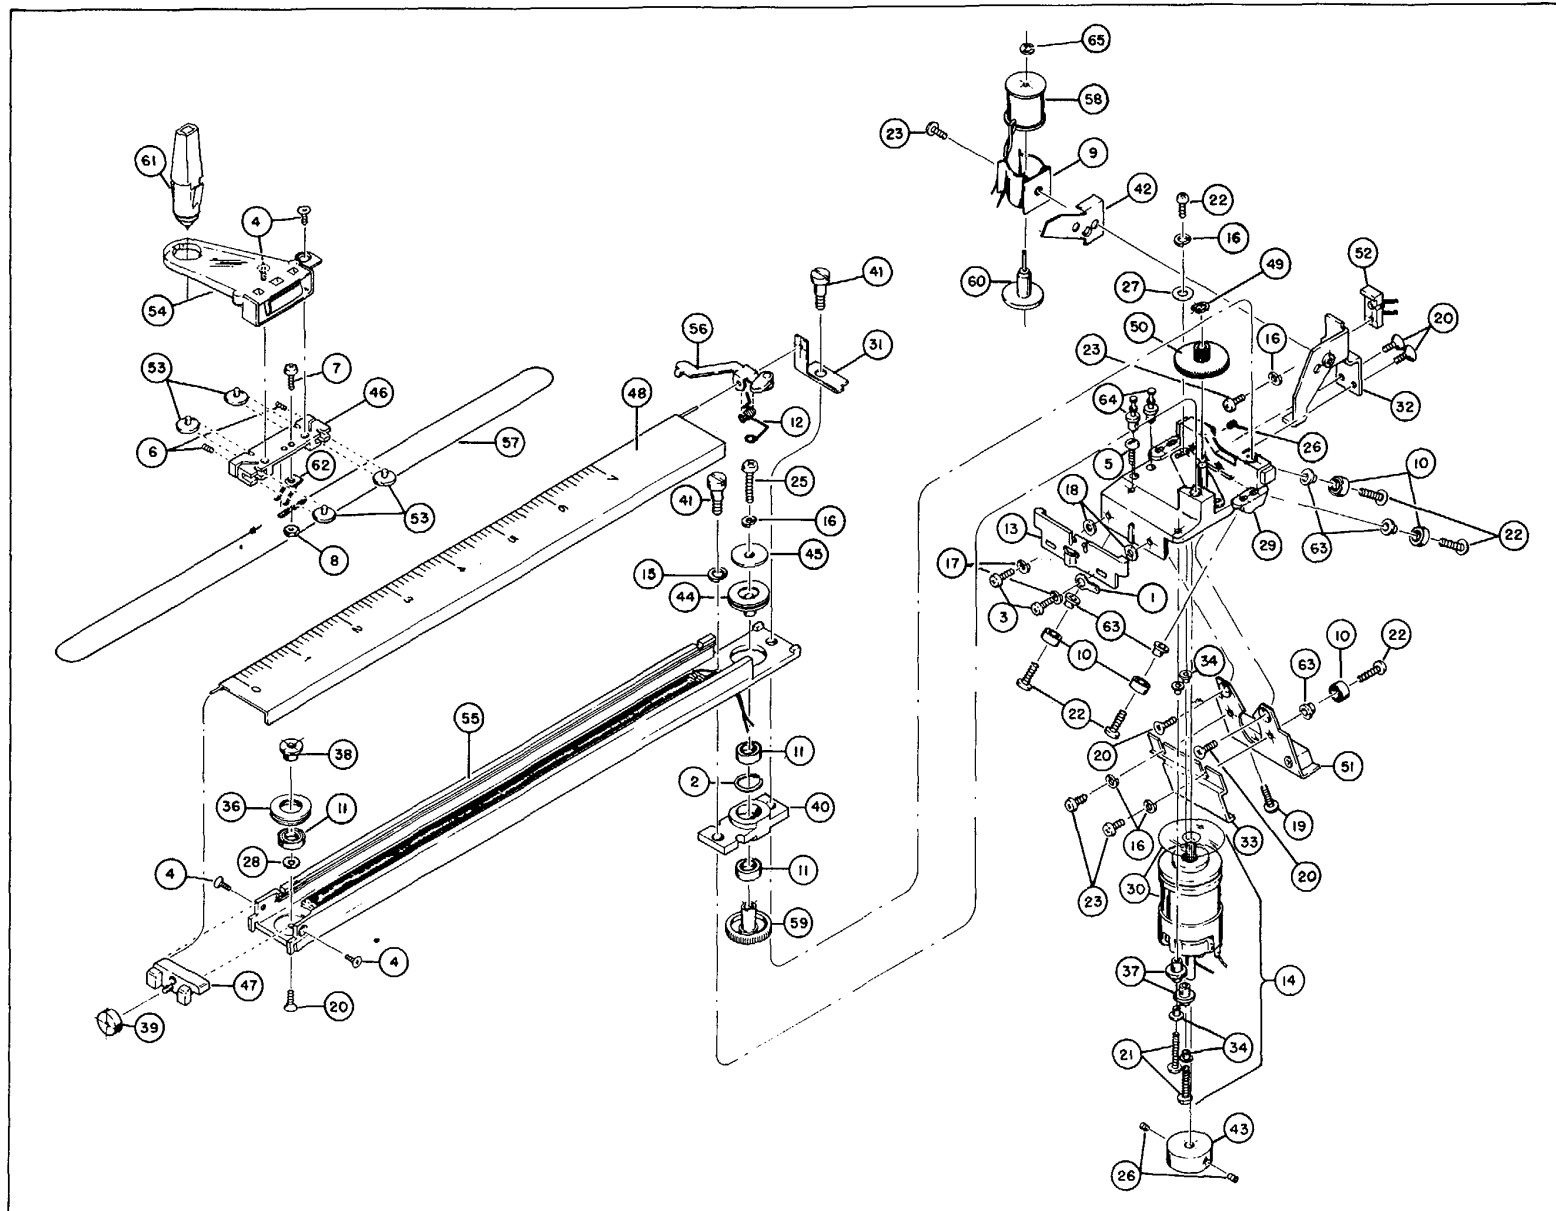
EXPLODED VIEW-CARRIAGE ARM (SHEET 1 OF 2)
